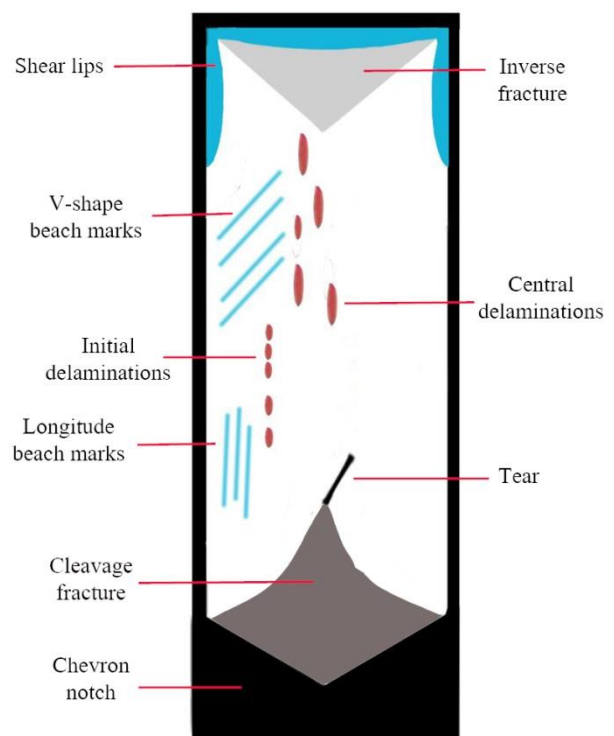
Schematic illustrations of fracture surface (left section of specimen)
